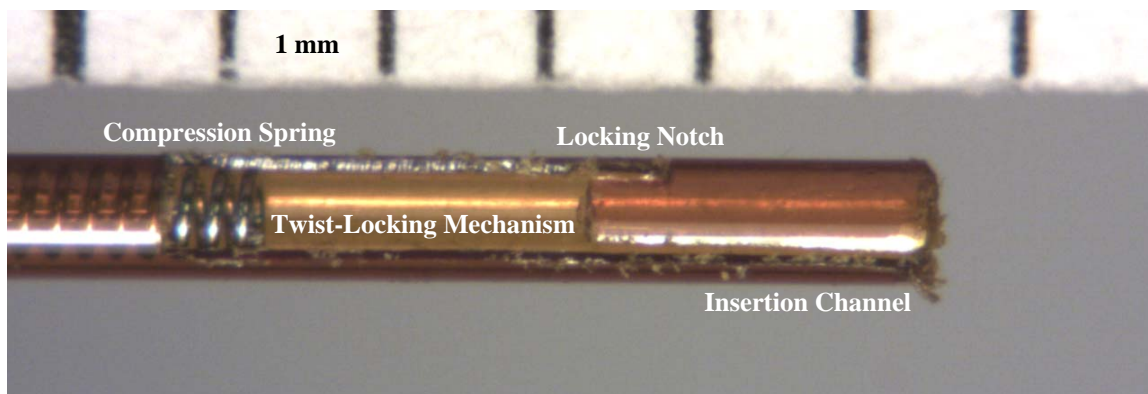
Photograph of detachable fiber tip twist-locking mechanism or “J-groove” with outer cover removed.
